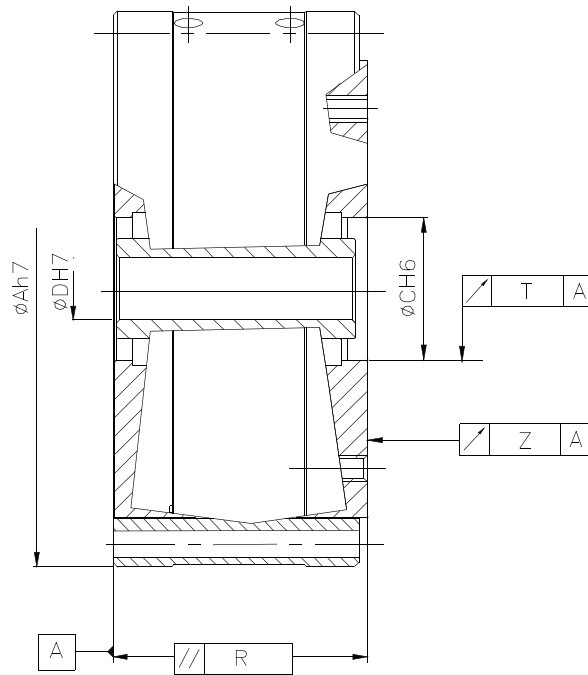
Circumferential and front run-out values of TwinSpin bearing reducers / Rund- und Stirnlaufabweichungen der TwinSpin Präzisionsgetriebe
